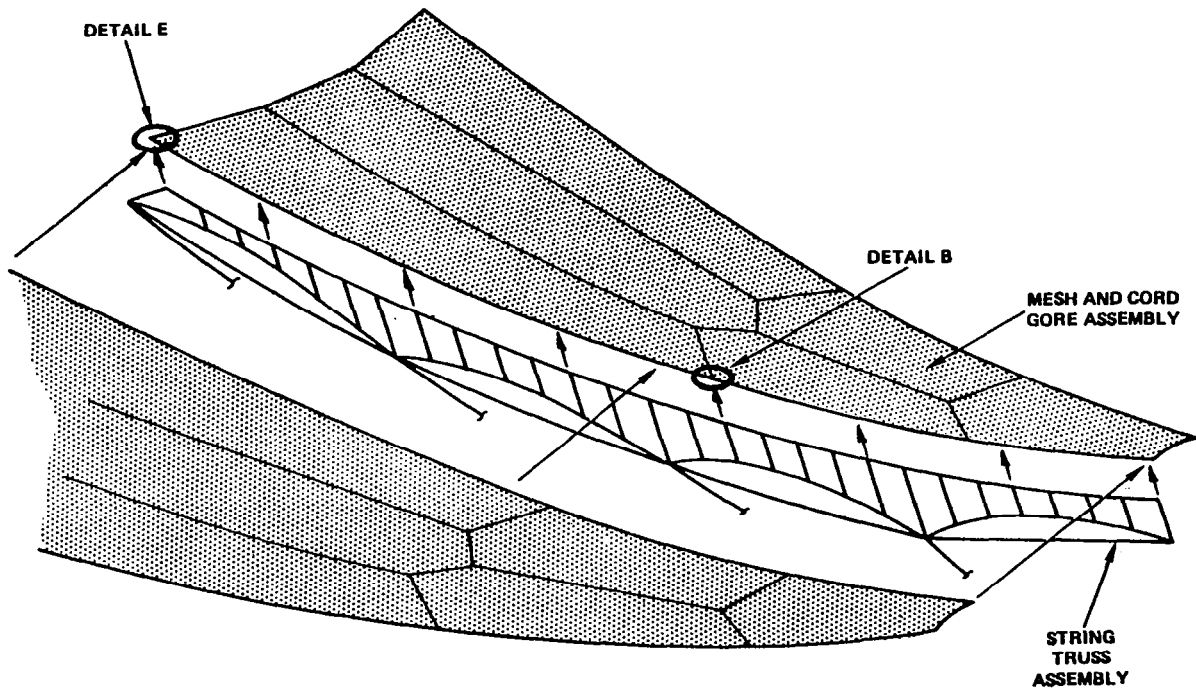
Gore Assemblies and String Truss Assemblies are Laced Together at Top Assembly
